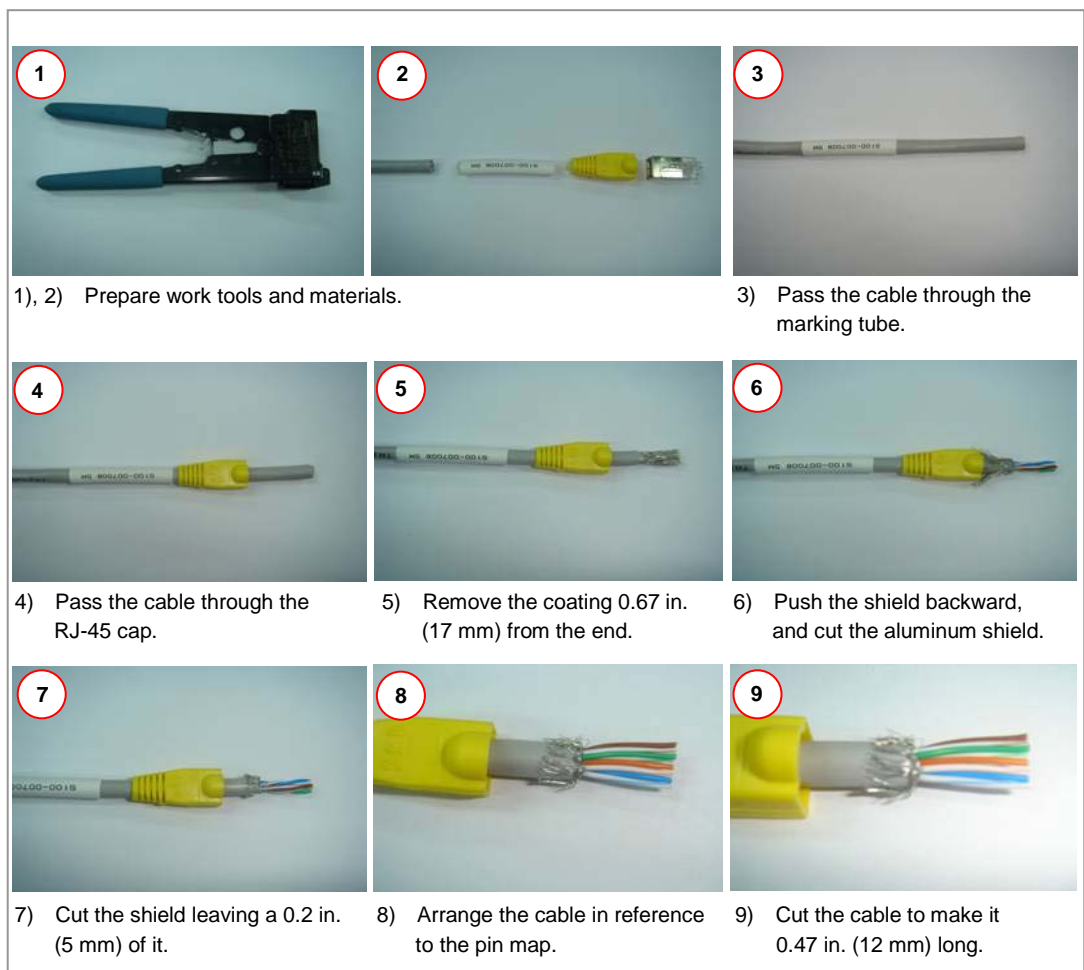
Assembling the RJ-45 Connector (Shield Type) (1)
